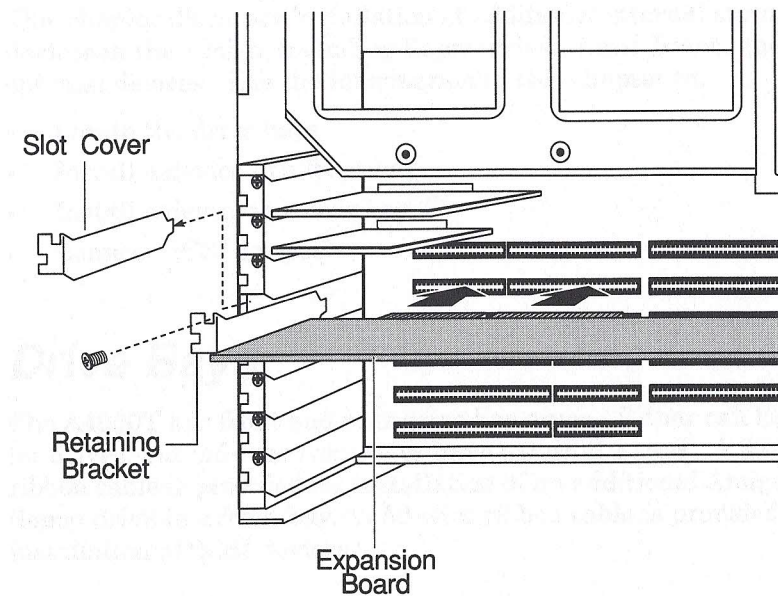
Removing the Cover Plate and Installing the Expansion Board
